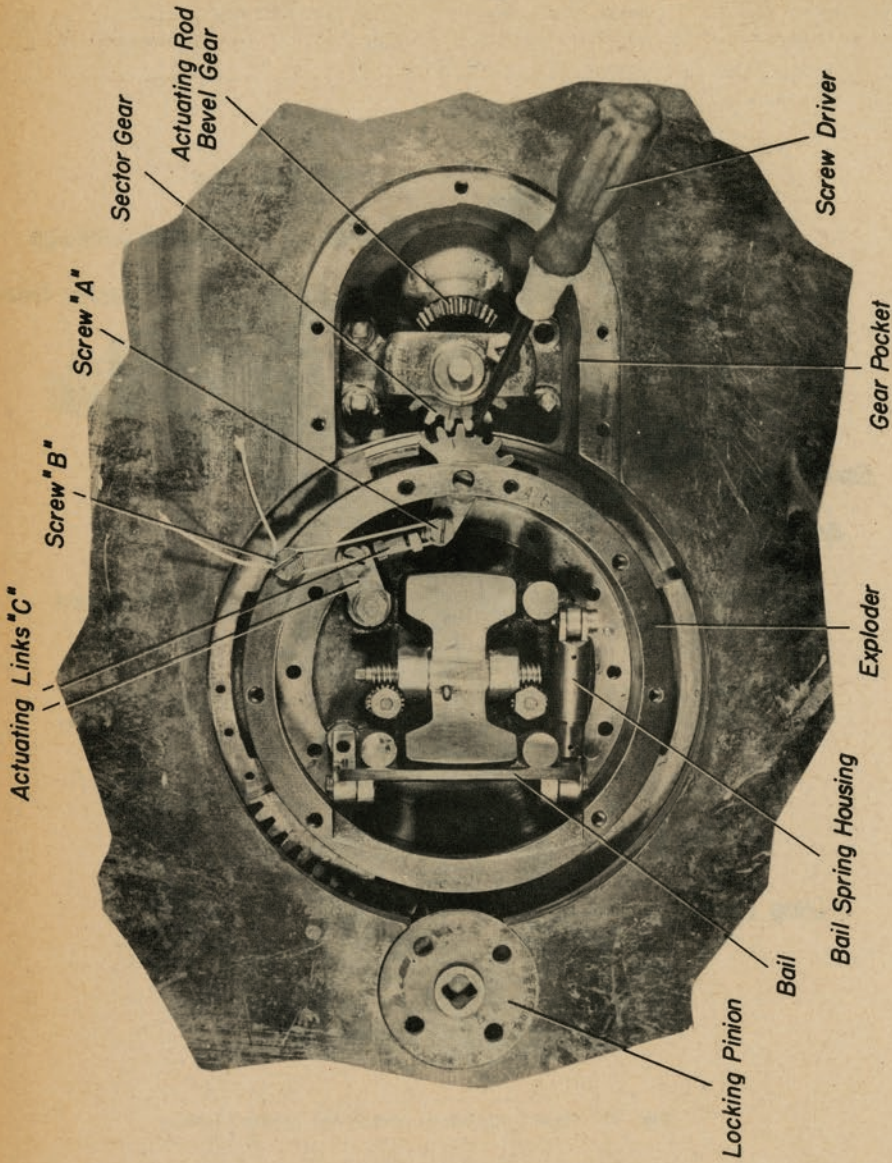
Type 3 Exploder, Showing RMS Precautions
